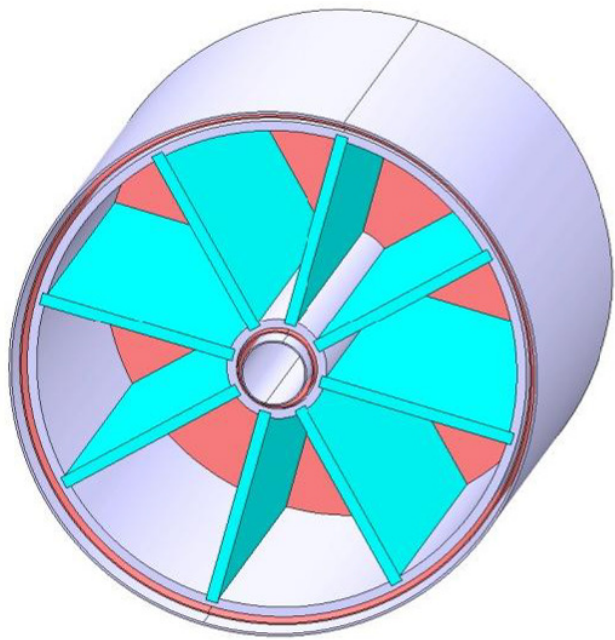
CAD drawing for a 2T air core toroid with 20 cm bore and a size about 1 m³
